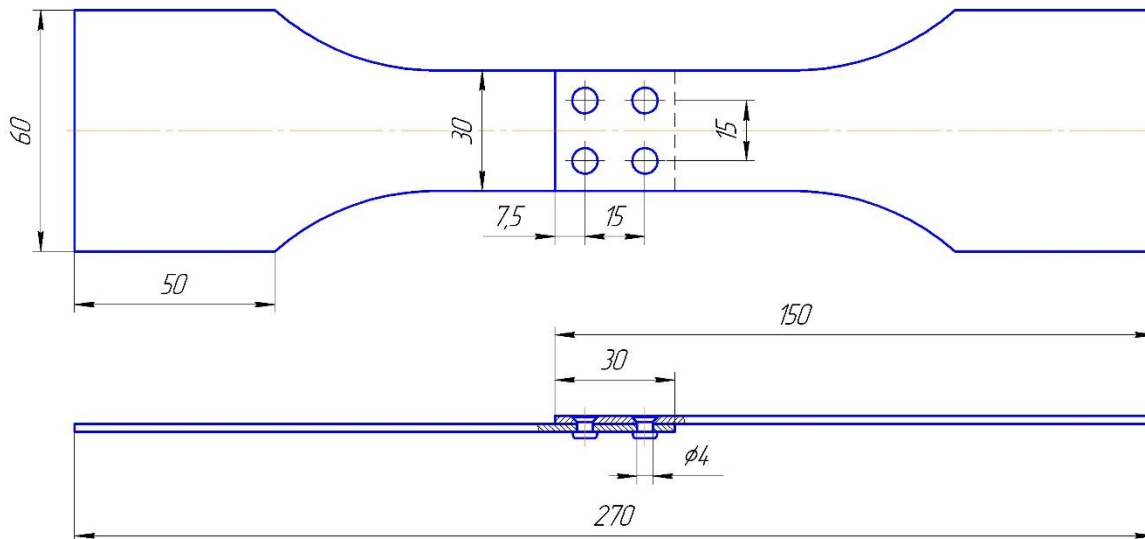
Standard specimen of double riveted lap joint (all dimensions in mm)
